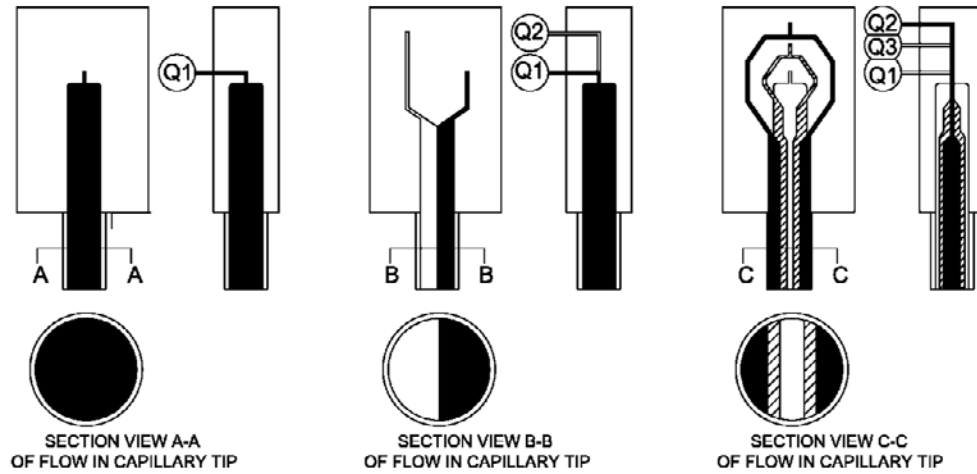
Front/right/section view of homogenous (left), layered (center) and axisymmetric (right) 2-dimensional SMMB deposition head channel concepts to assemble multiple materials in 1-dimensional array.
